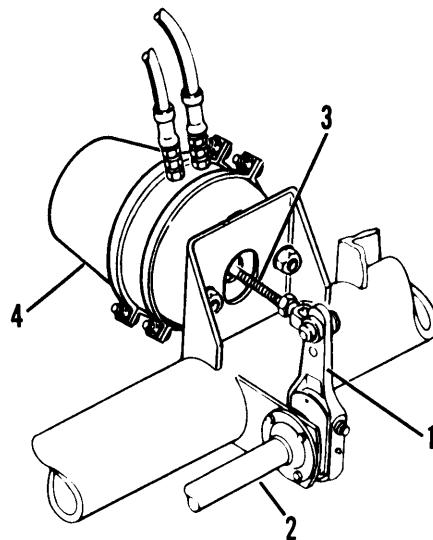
Slack Adjuster and Spring Brake Chamber
